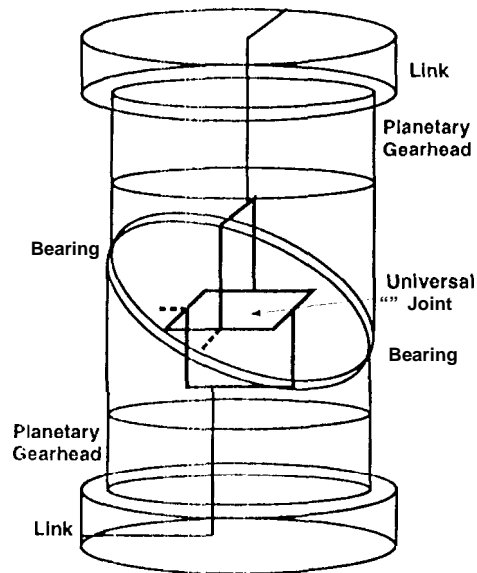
The kinematic diagram of the Serpentine Robot joint, showing the internal universal joint and the external gear-head-bearing-gearhead system.
